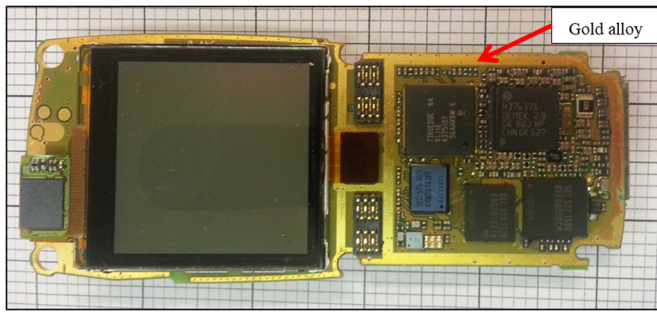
Photograph of the coated Au on the surface of a mobile phone PCB
